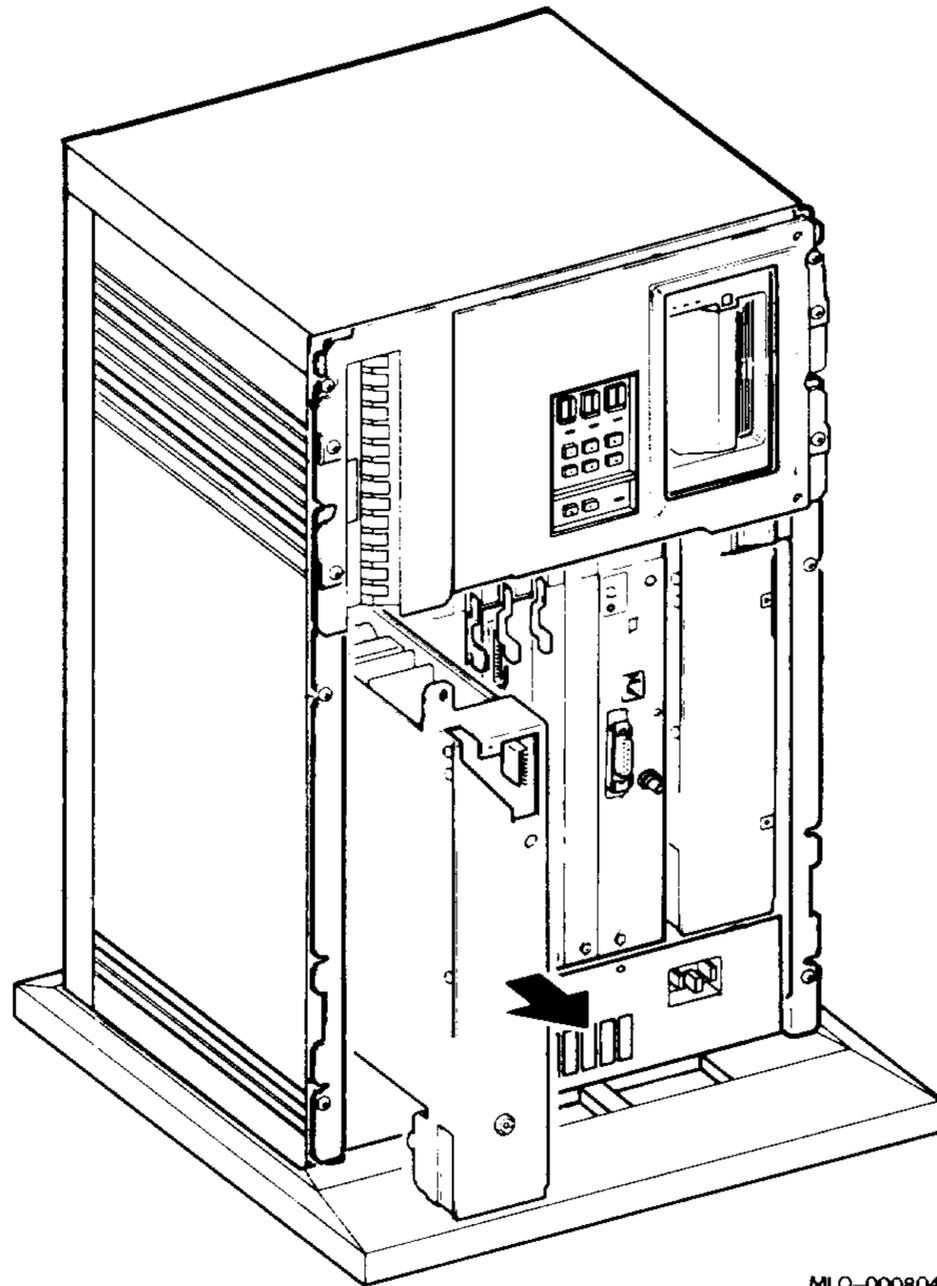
Removing the Power Supply Cabling and Screws
